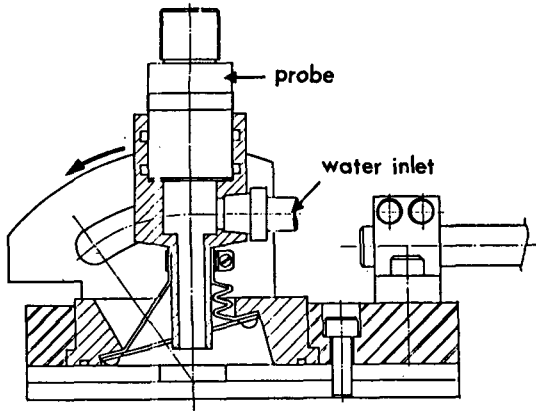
Ultrasonic welded zone inspection principle.
